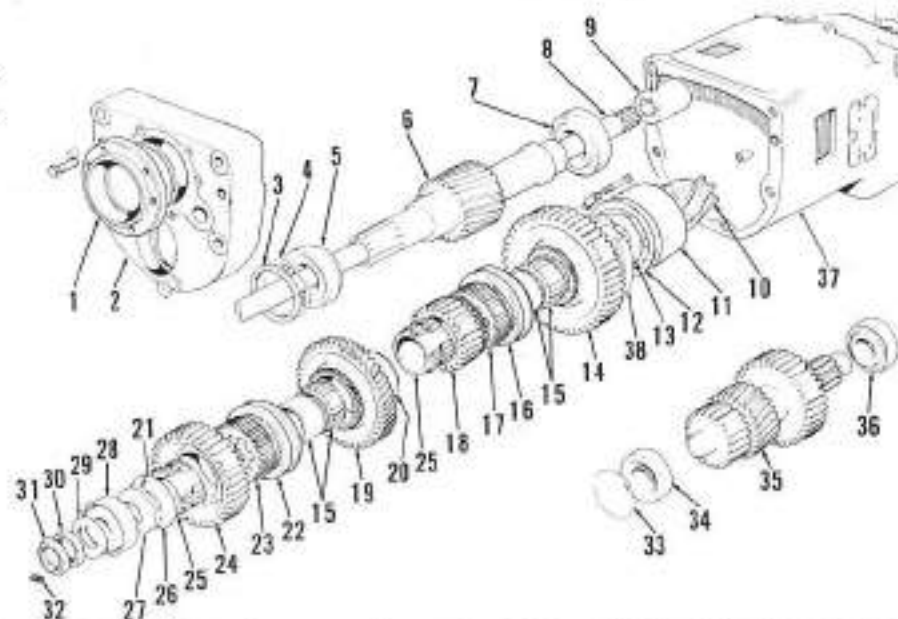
Exploded view of range gear box used on 1212 and 1412 models. Center housing (2) and plate (1) are also shown in Fig. 116.
